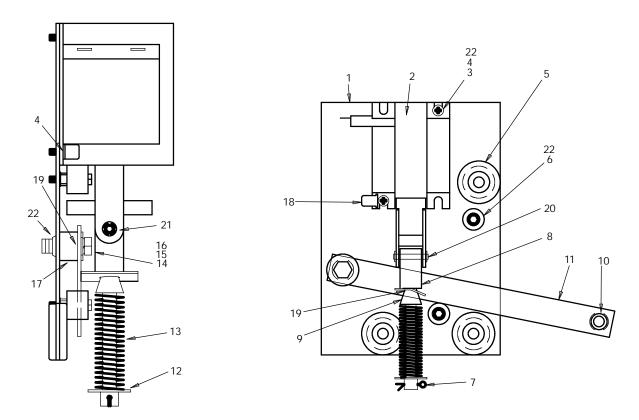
SOLENOID ASSEMBLY EXPLODED VIEW AND PARTS LIST
